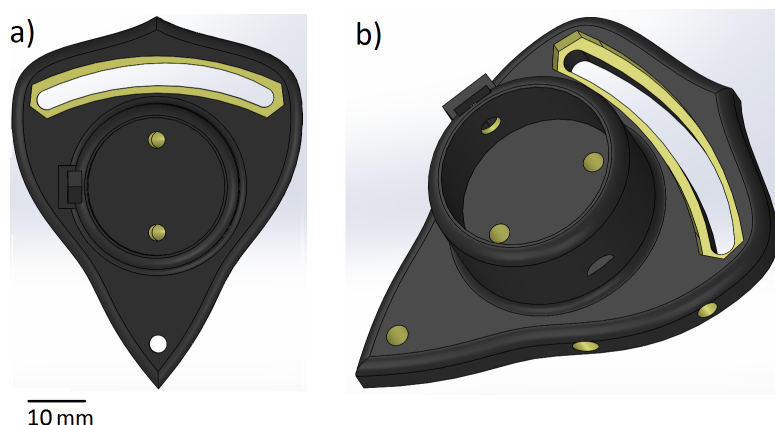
a) Top view of the motor holder piece. b) Side view of the motor holder piece.
